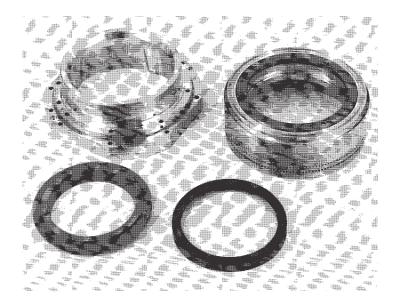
Overall view of a Wagstaff AIR-SLIP $^{\rm m}$ casting mold for 6" diameter extrusion billet.
